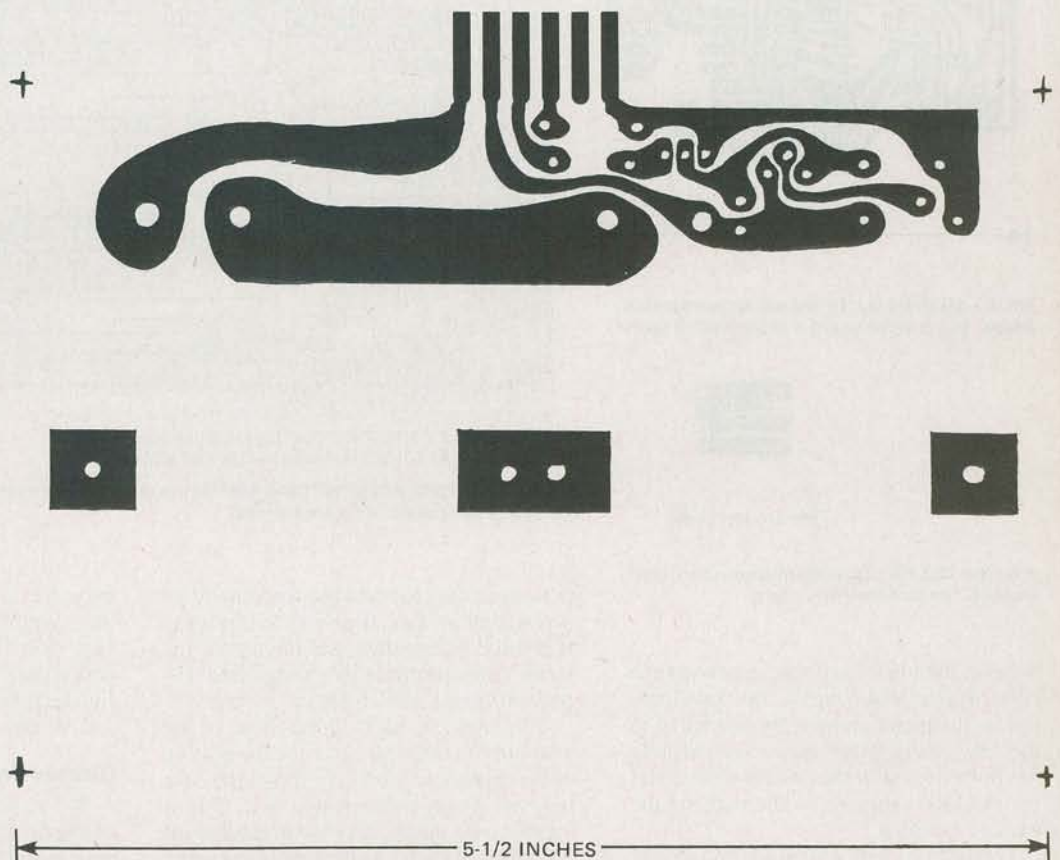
MOST OF BOARD 3 is taken up by battery holders. The foil pattern for that board is shown here.
